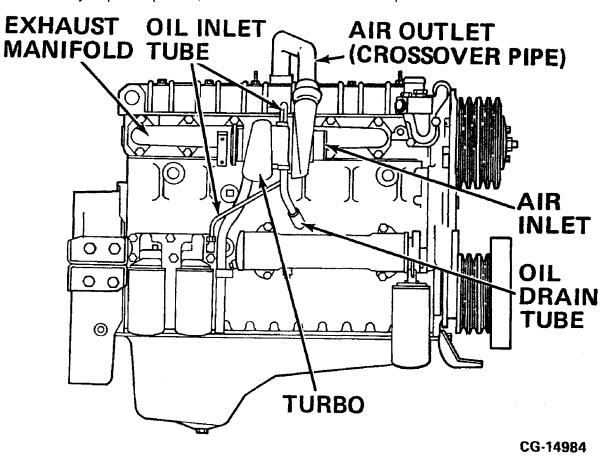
Turbocharger Removal (DT-360 Shown, DTA is Similar)
